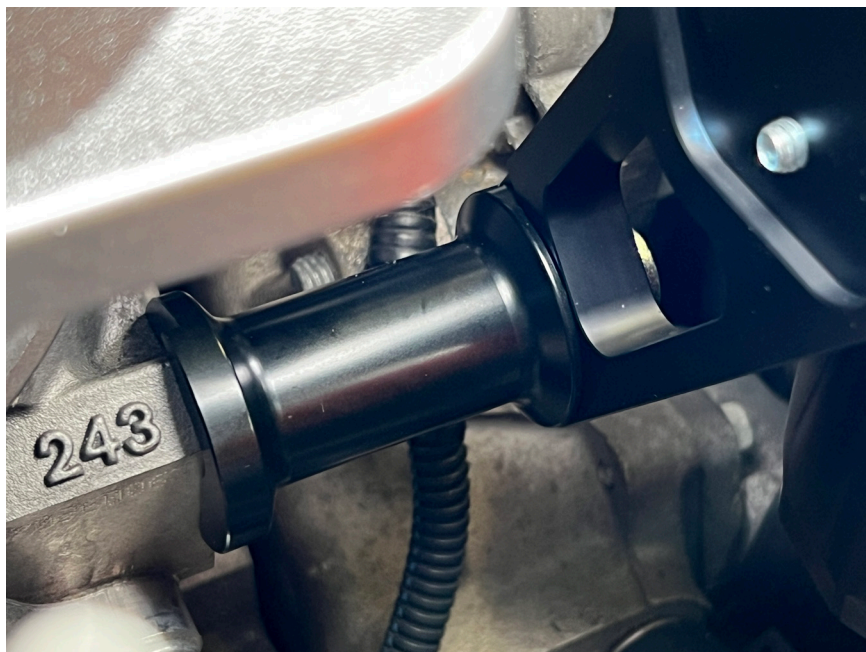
Bracket & Spacer Mounted to Cylinder Head
